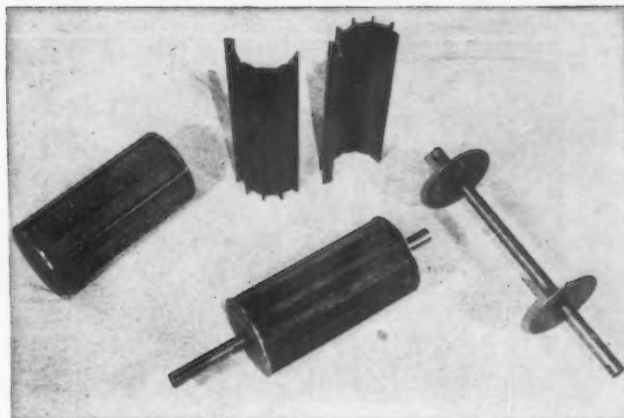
At left is former corrugated roll. New welded roll and shaft (center) are fabricated from steel shapes as shown.
